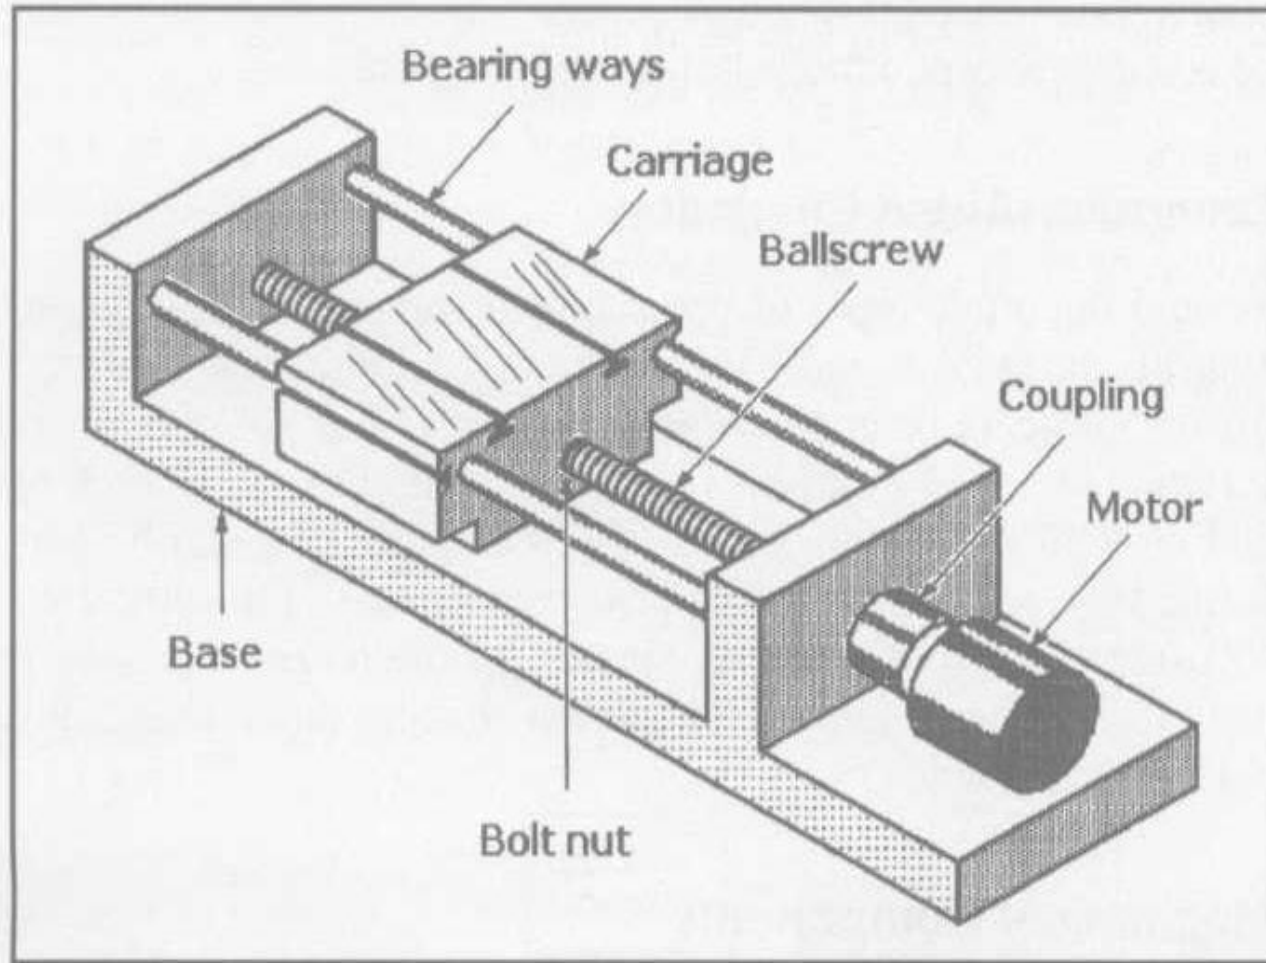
Ballscrew-driven single-axis slide mechanism without position feedback sensors.
